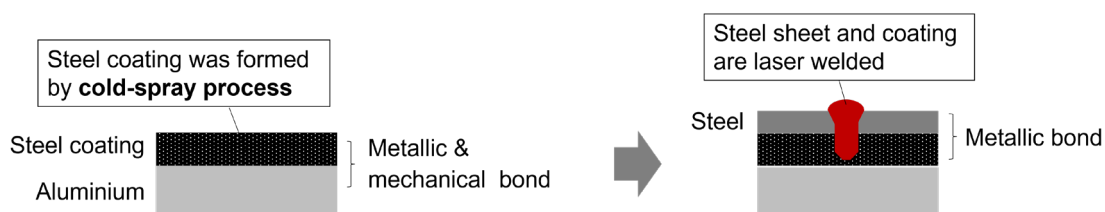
Schematic illustration of laser lap-joining of steel to aluminium with a cold-sprayed steel interlayer
